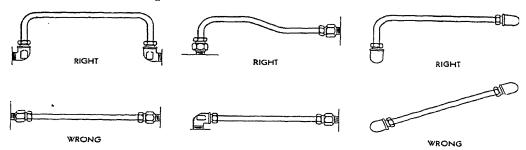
Right and wrong way to make tube installations. (Courtesy of Parker Appliance Co.)
